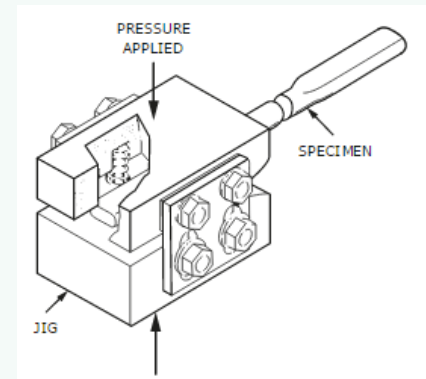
Squeezing Jig for Flattening Ends of Full-Size Tension Test Specimens
